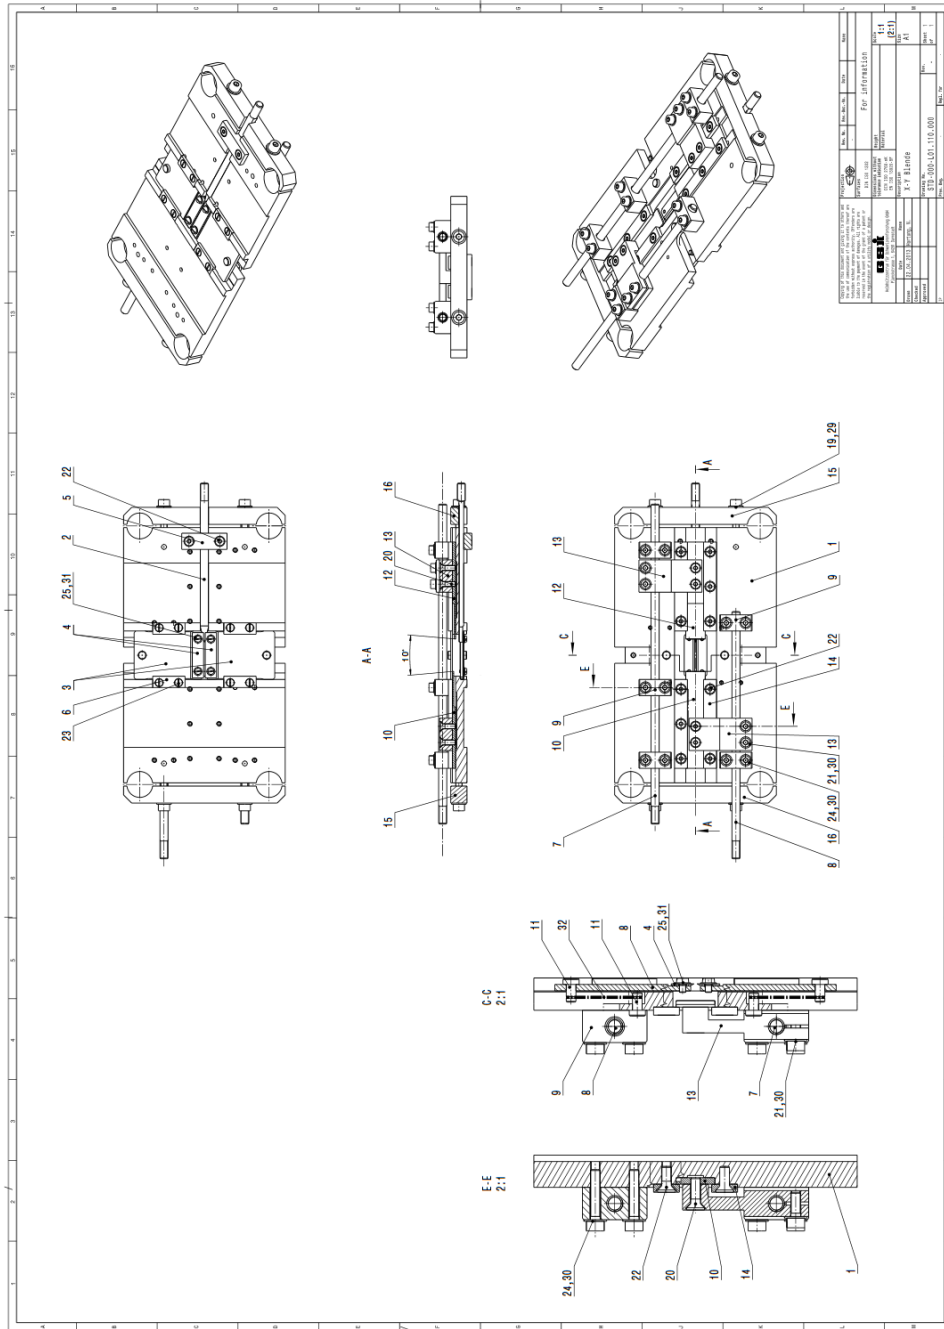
Technical drawing of an XY Aperture modul [117].
